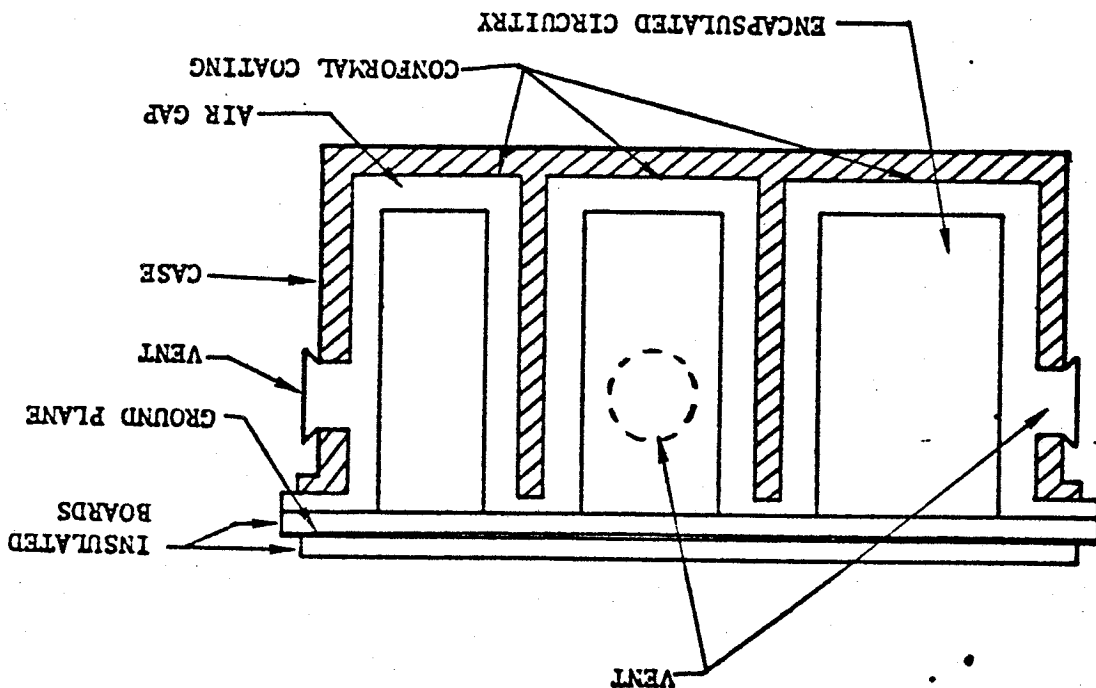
REMOVABLE ENCAPSULATED PACKAGING
